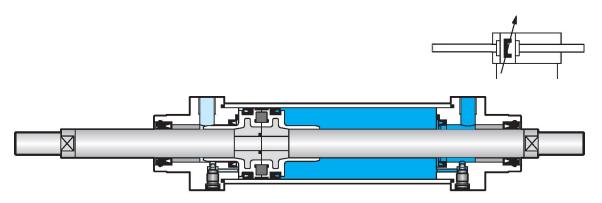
Cylinder with through piston rod – sectional view and symbol
